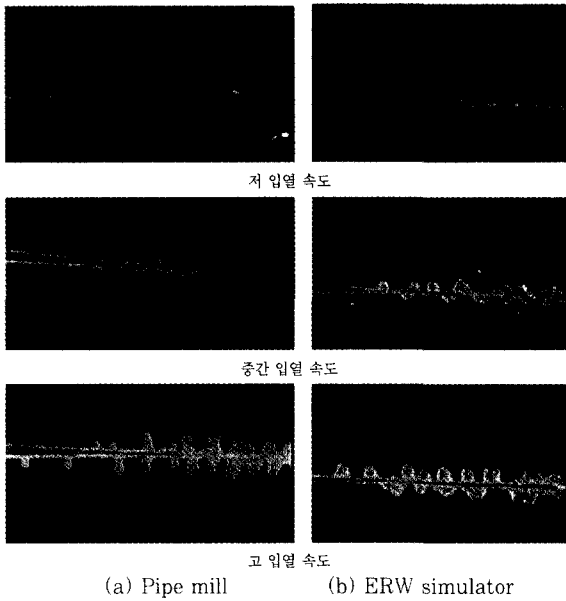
High speed cinematography of welding phenomena of HF ERW process. (a) welding on pipe mill and (b) welding on ERW simulator.
